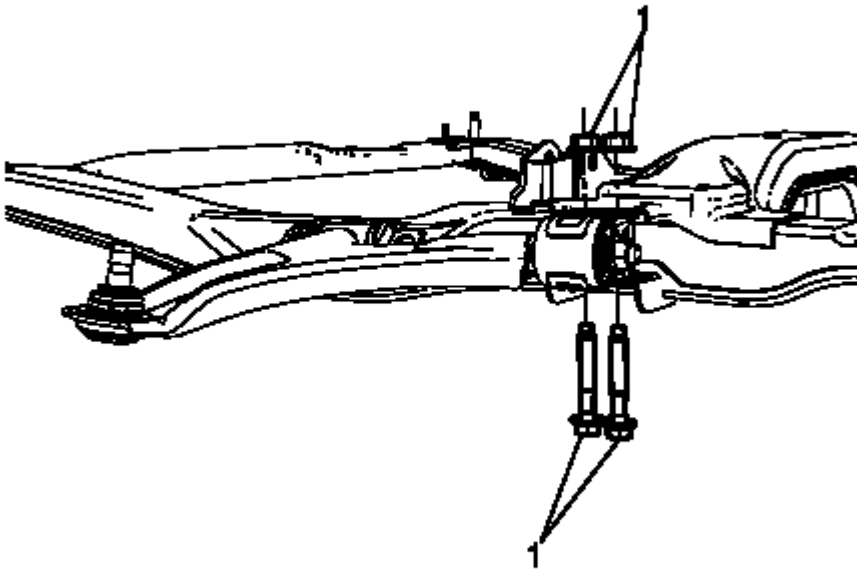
Rear Lower Control Arm And Cradle Bolts
